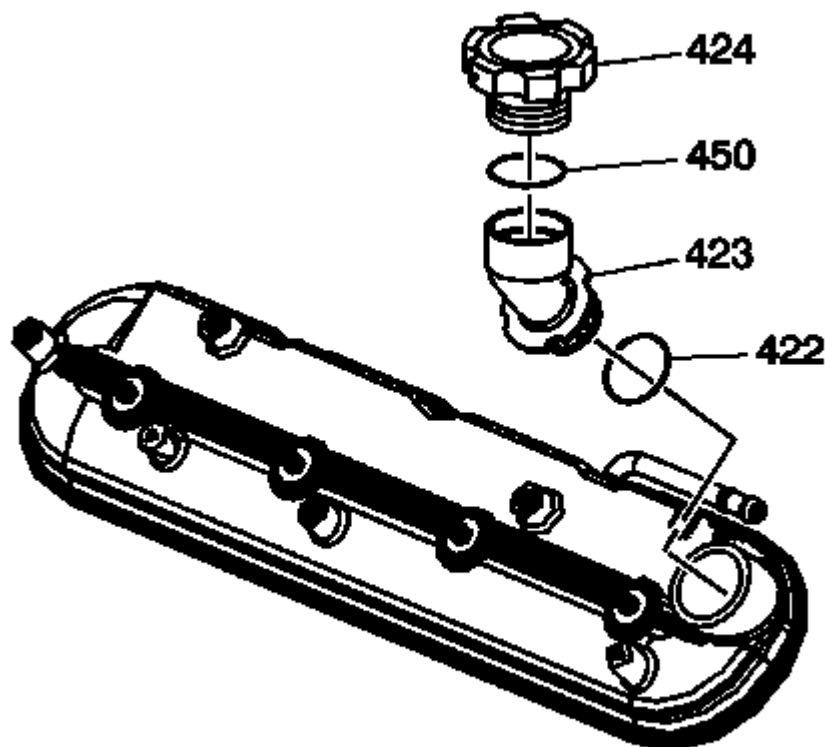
Oil Fill Cap & Oil Fill Tube
